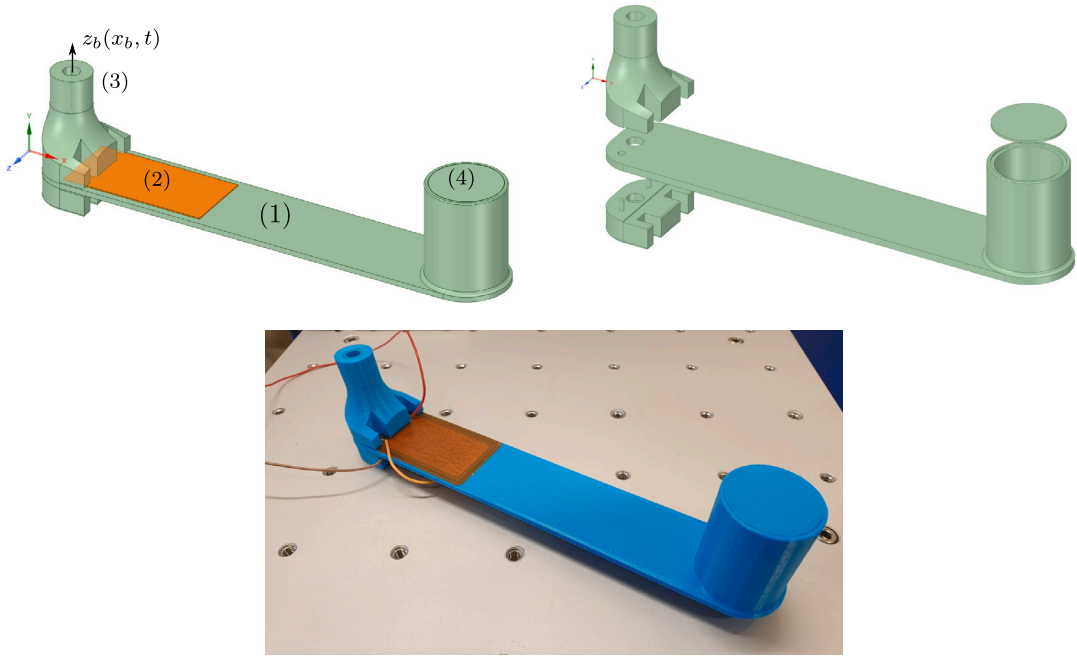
CAD model, exploded view and printed prototype: (1) substructure, (2) PZT patches, (3) clamp and (4) mass storage.
